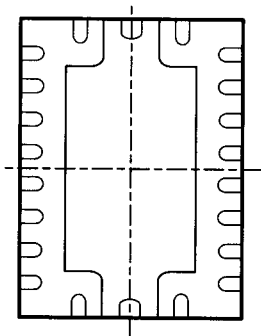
Bottom view of IC showing power pad restriction by signal pins.
